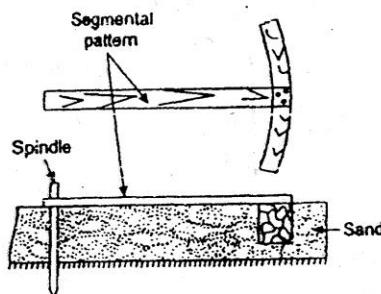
Fig. A segmental pattern used for molding a ring-shaped casting. Bottom of the mold is first rammed and levelled and the spindle (or pivot) is erected vertical in the sand in the centre of mold. Segmental pattern is fastened to the spindle and sand is rammed underside the pattern. After levelling the sand, the first setting of pattern is thus completed. Later, the pattern is unfastened from the spindle and is drawn out of the sand. The next position of the pattern will be the one just adjoining its first setting and like that the process is continued till the complete periphery of the ring-shaped casting is molded.
